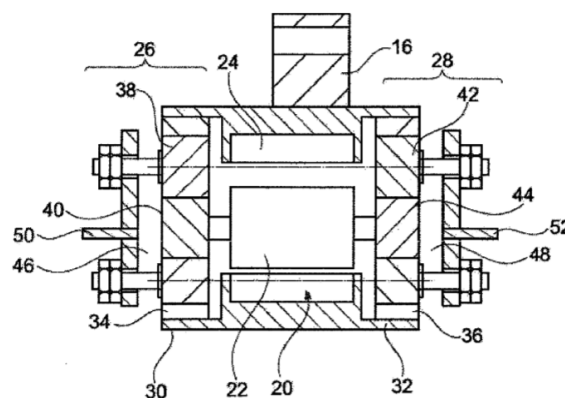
example of planetary gearbox stage, Audi patent 2014 [10]
